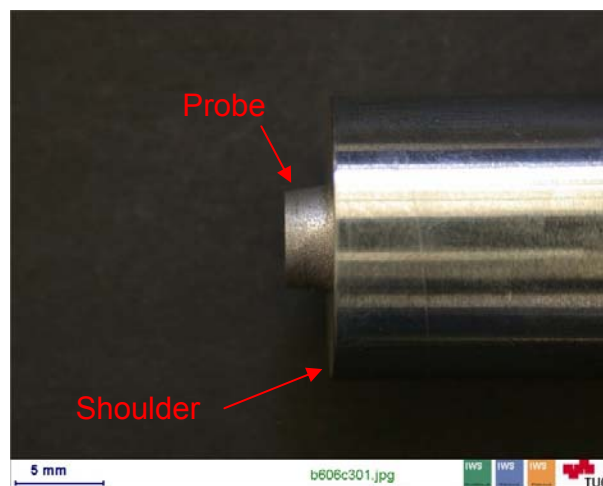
Tungsten 25% Rhenium tool, showing tool probe and tool shoulder
